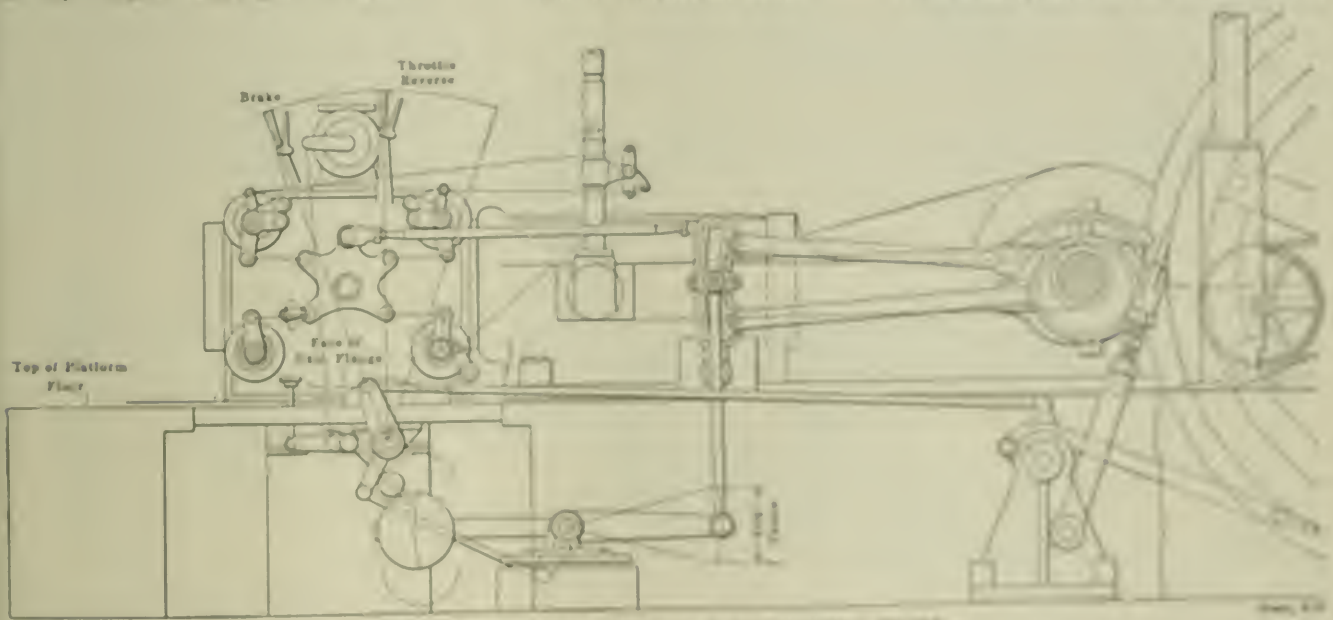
ECCENTRIC LINK AND GEAR, STEPHENSON ENGINE.
